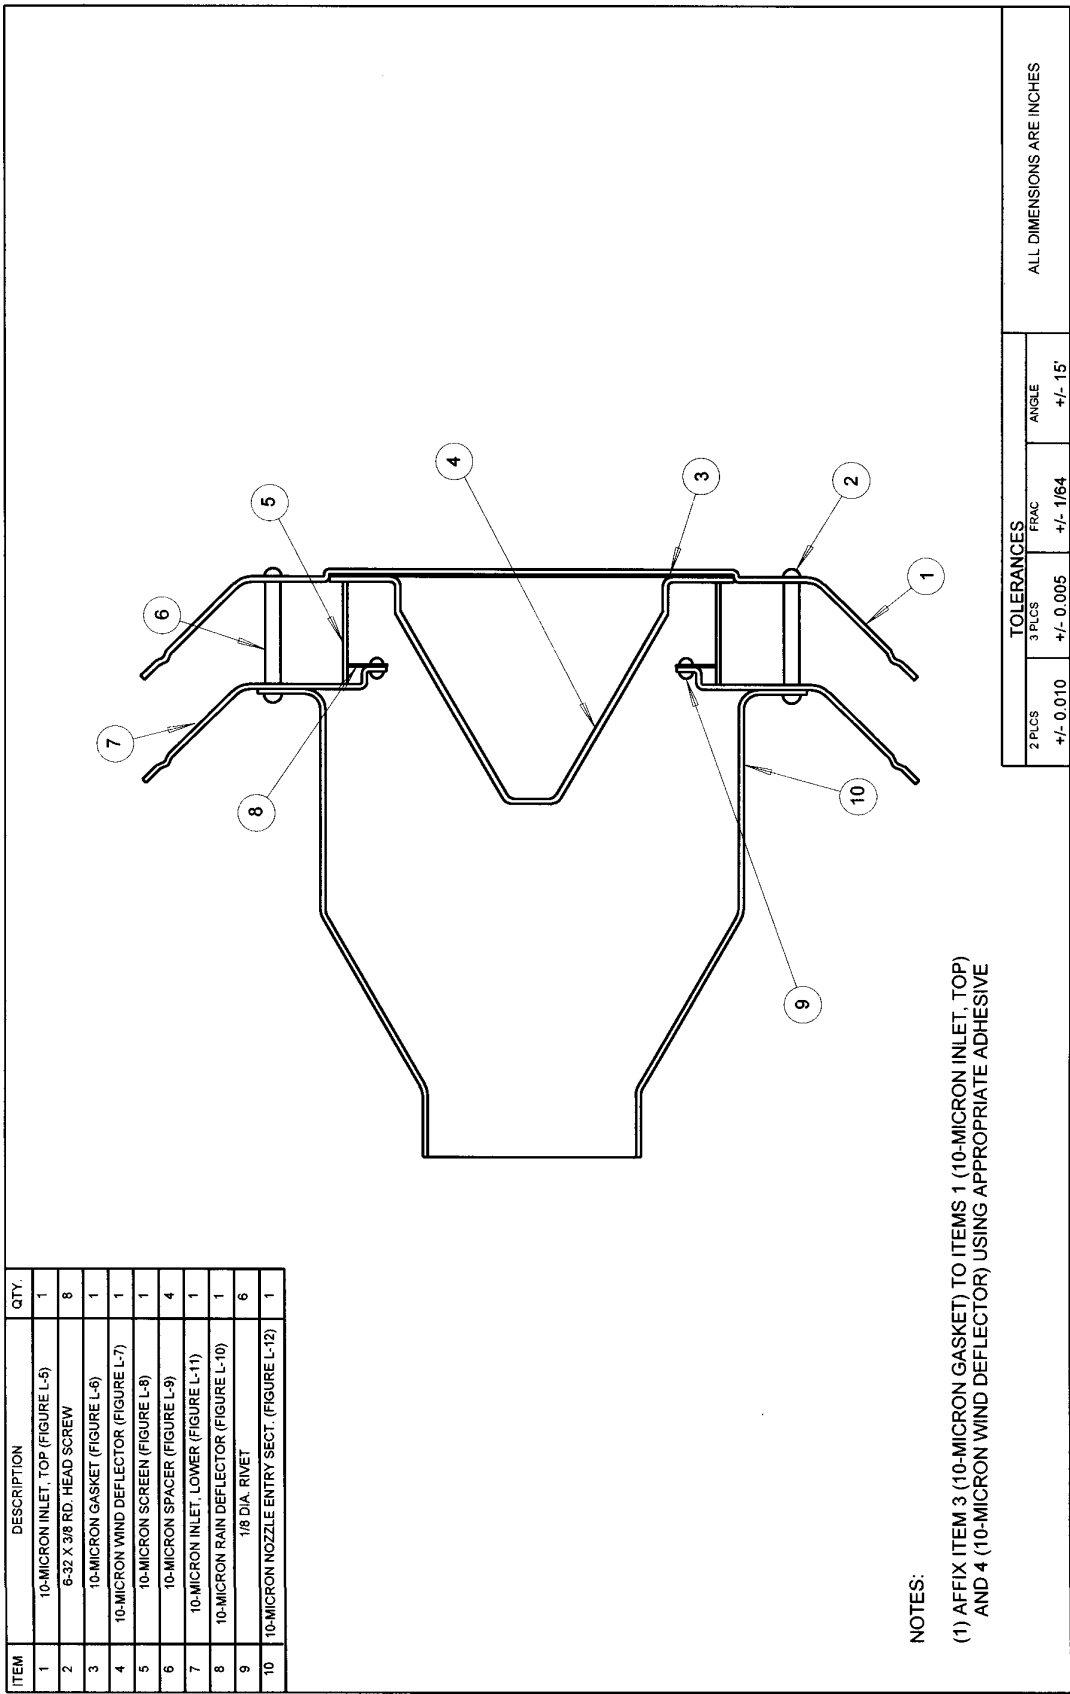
10-MICRON ASSEMBLY, LOWER SECTION
